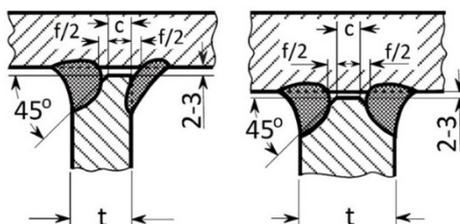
Single and double-bevel welds with unwelded root face and defined incomplete root penetration
